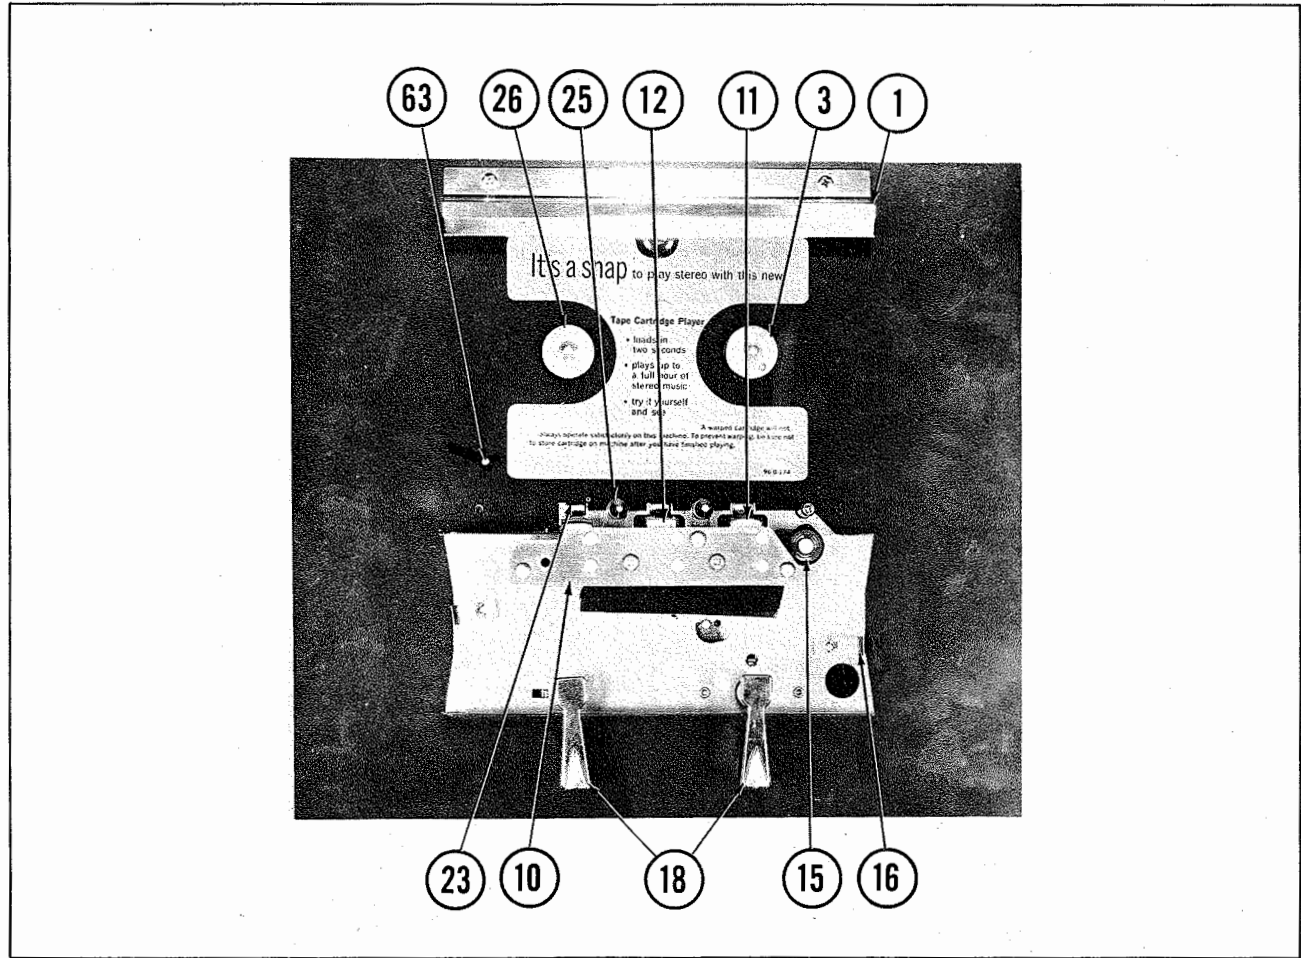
TOP VIEW OF MECHANISM WITH HEAD COVER REMOVED
